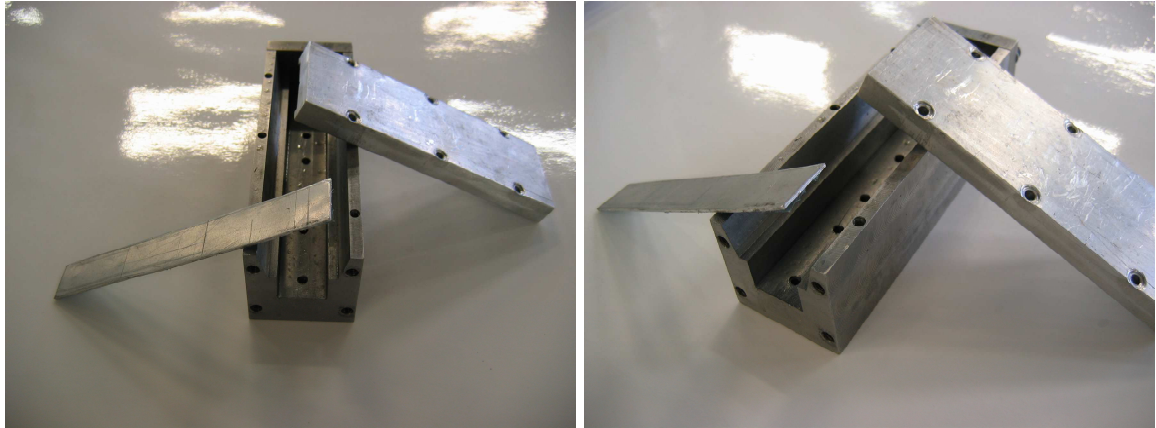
Pictures of the jig used to produce the 150mm long stator tooth pieces
